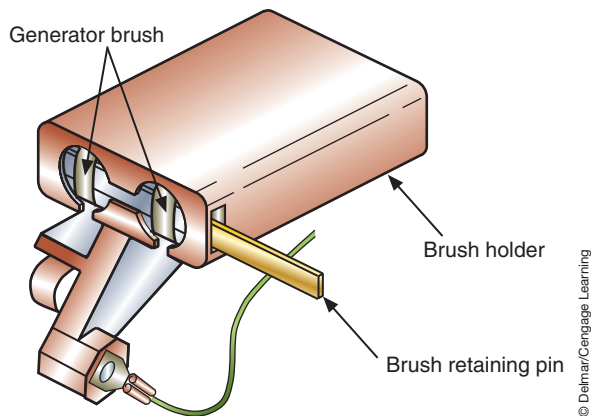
When assembling a generator, use a pin to hold the brushes back so the rotor can be inserted into the brush holder.
